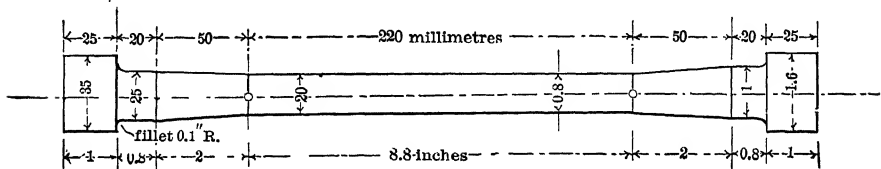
STANDARD TEST-PIECE IN TENSION.
